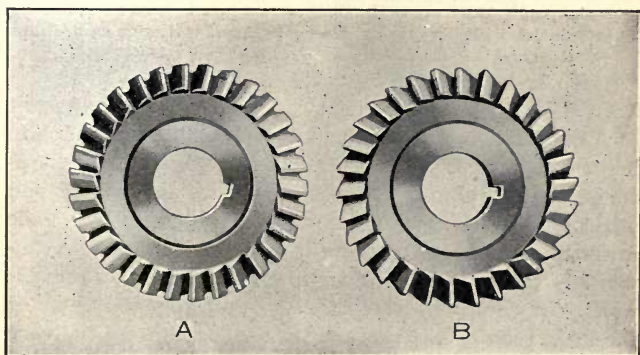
Steps taken in re-cutting a milling cutter without annealing.
